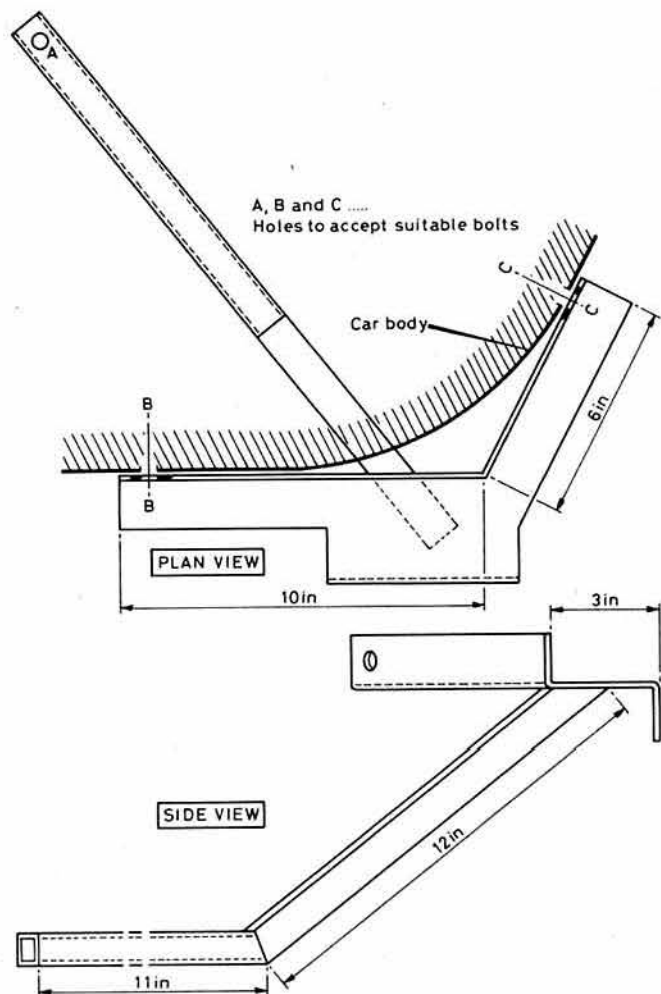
This shows the support bracket for the antenna. Bolt A is one of a number round the petrol tank circumference. Bolts B and C are those used to hold the bumper in place. The material used is mild steel angle of side 1.5in and 1in square section hollow bar. The finished bracket should be well cleaned and coated with a ferrous metal primer and top coat
